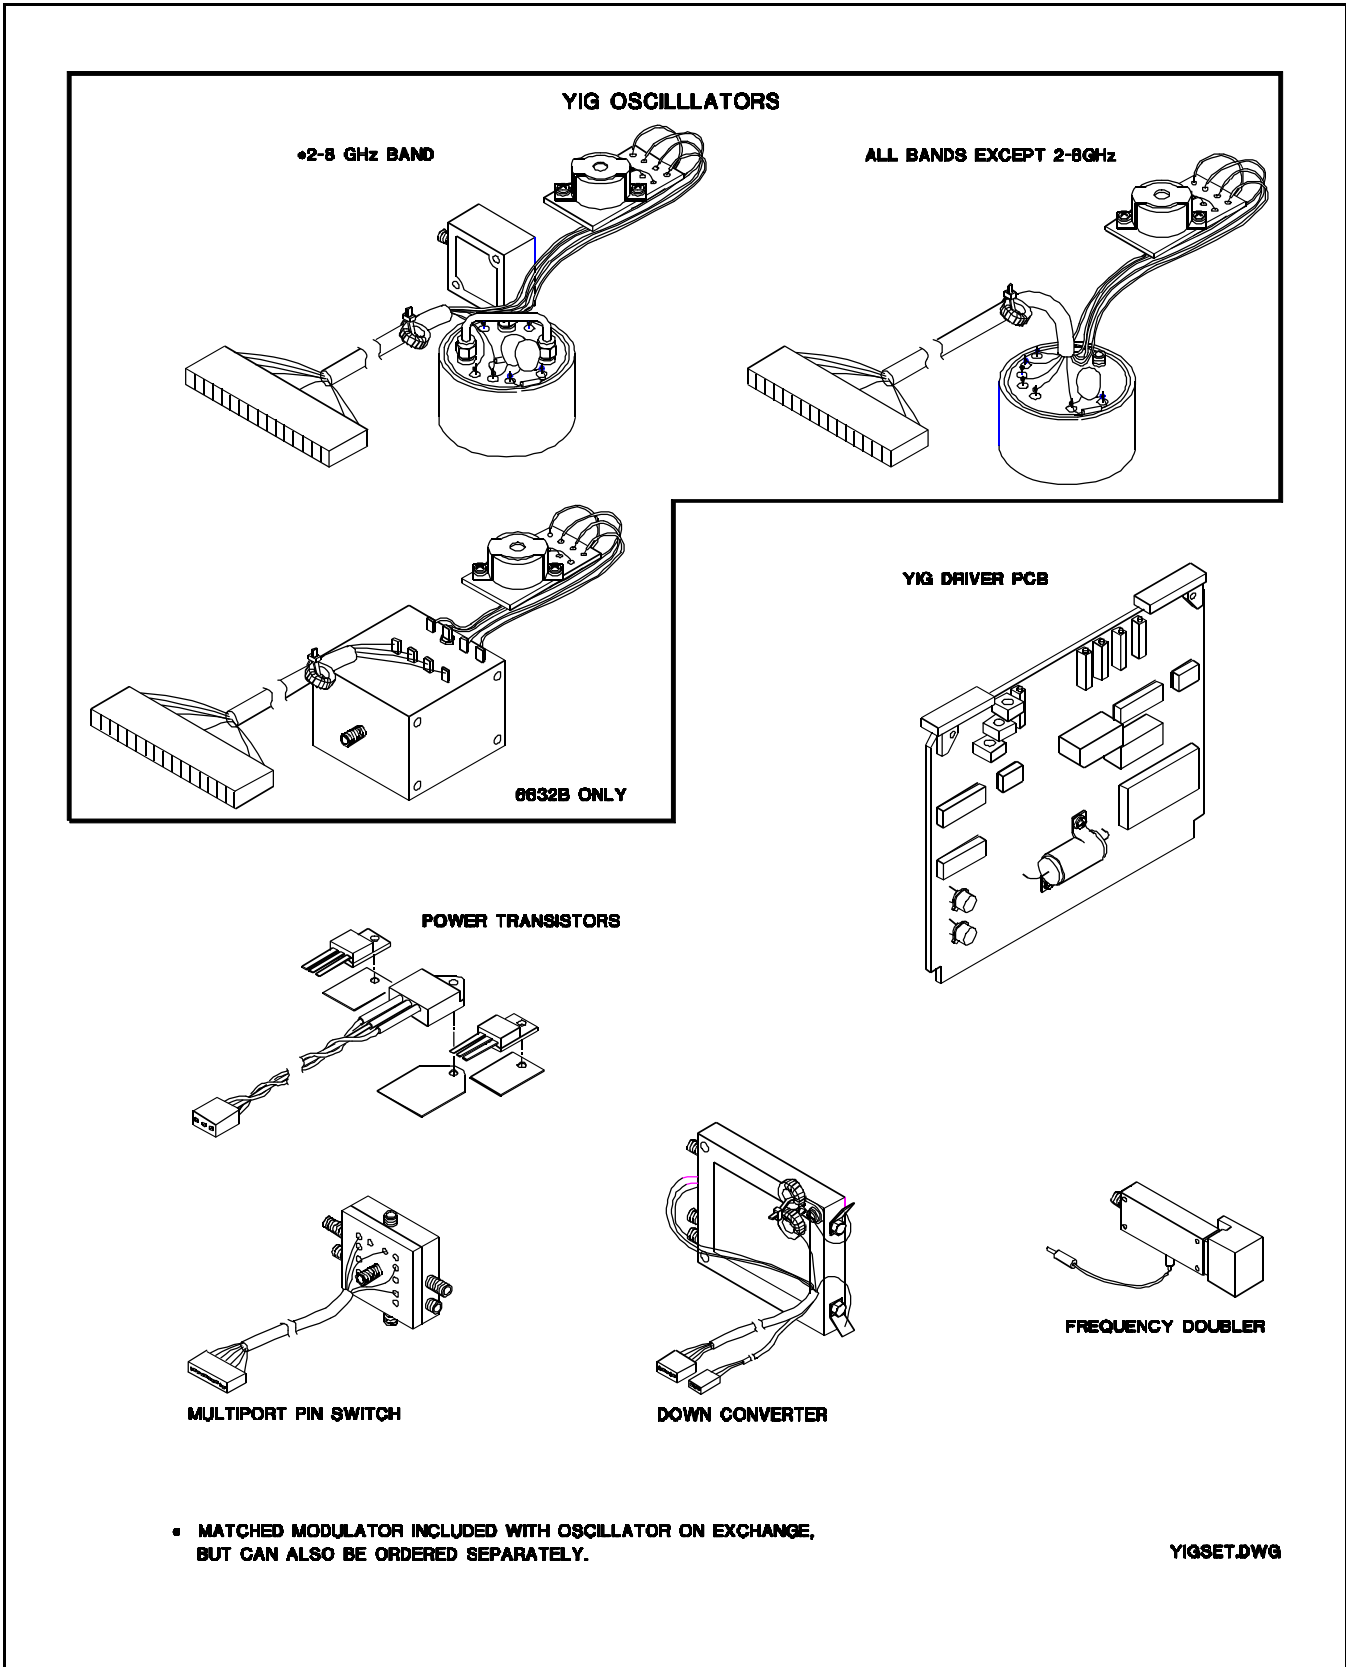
A4 RF Deck Assembly Components (1 of 3)
